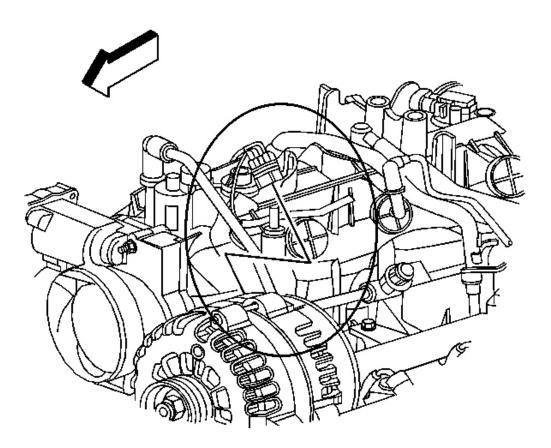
View Of Generator Cable Boot, Head, Nut & Bolt Courtesy of GENERAL MOTORS CORP.
